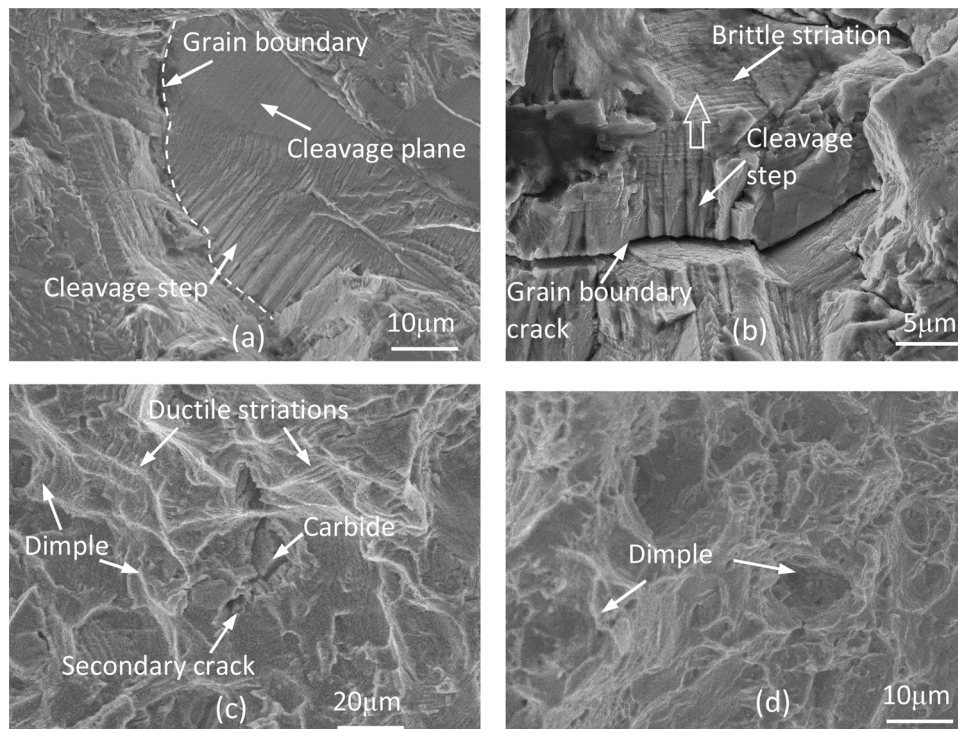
Examples of common morphologies on the fracture surface of Inconel 718 under four points bending fatigue testing: (a) and (b) fatigue crack area, (c) transition area and (d) static crack area.
